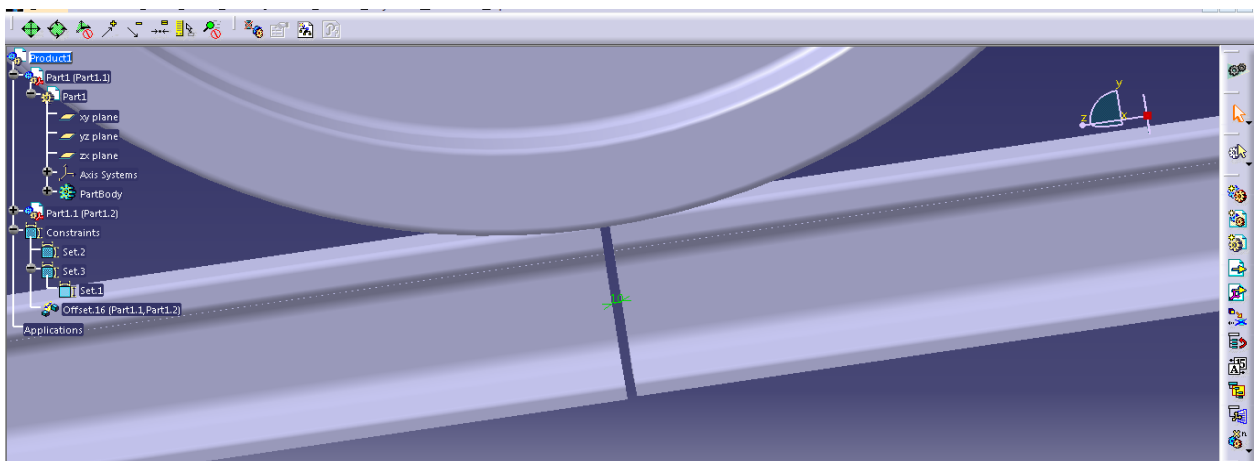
3D Catia modeling of wheel, bolt-jointed rail and track assembly
